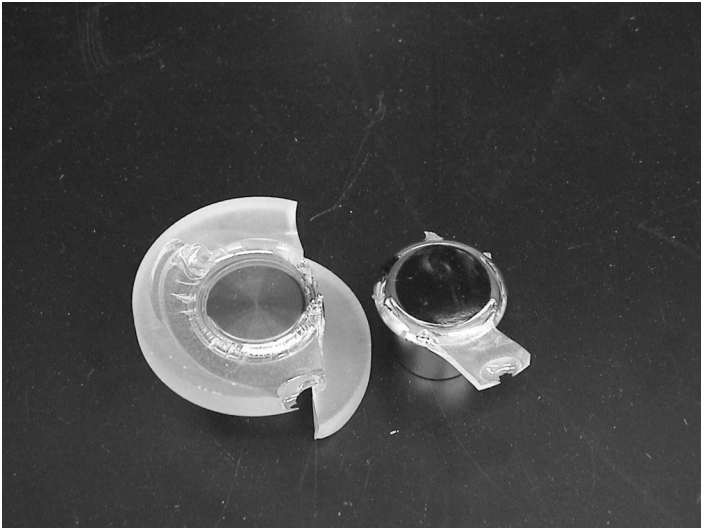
Failure surfaces of gold-plated saucer samples.
